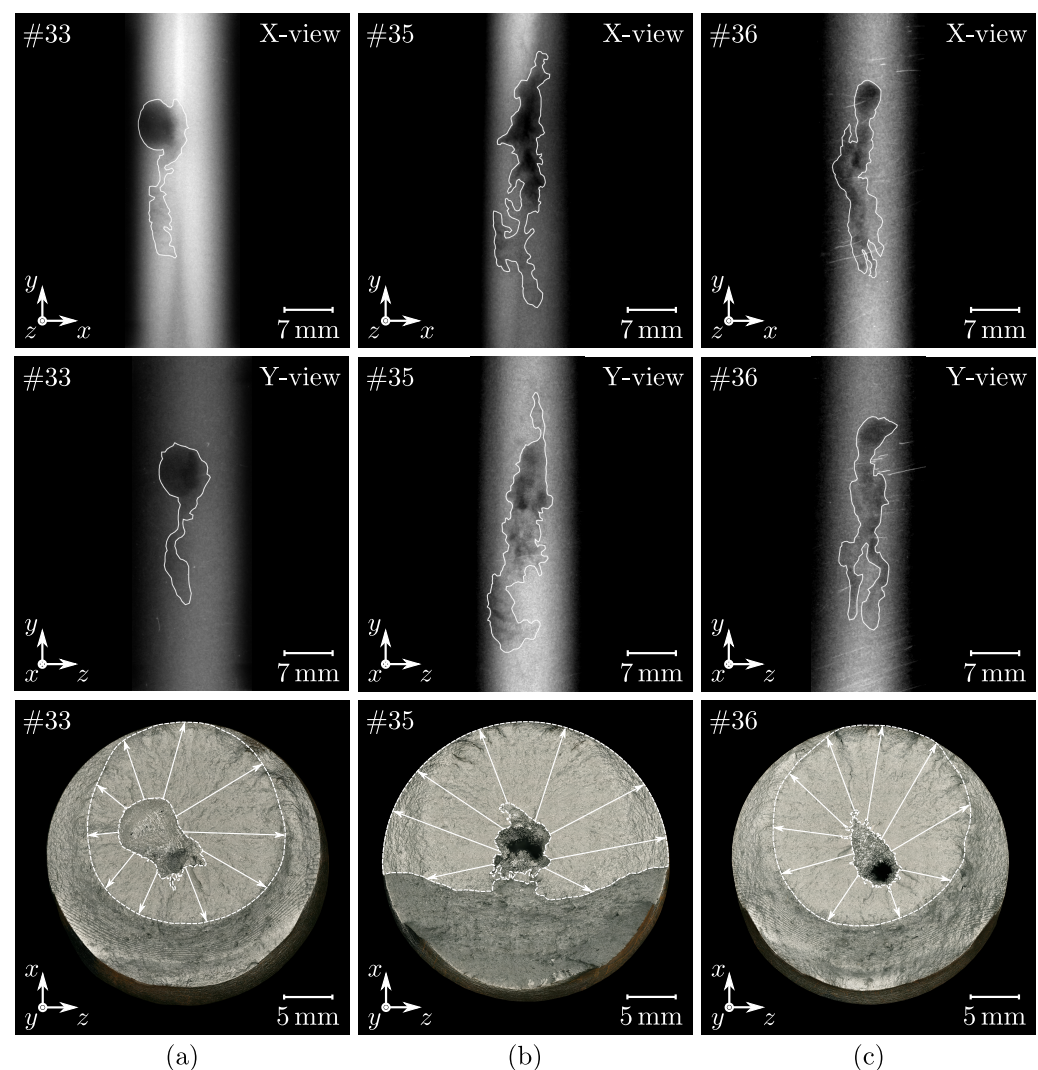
Radiographs and fracture surfaces of representative bulk defect-afflicted large-scale specimens tested at $R = 0.5$: (a) Specimen #33. (b) Specimen #35. (c) Specimen #36.
